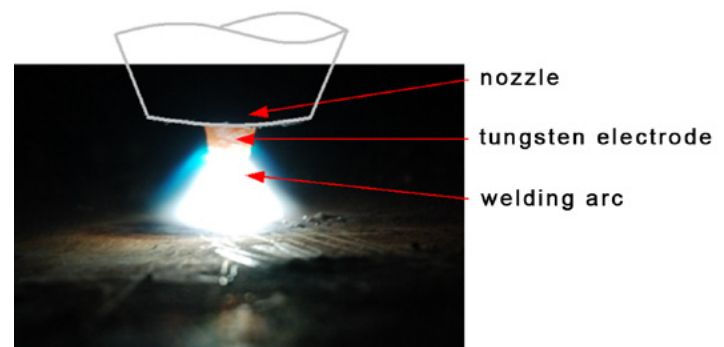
Shape of welding arc in TIG method, welding current intensity $I=100A$, welding arc length $L=2\text{ mm}$
